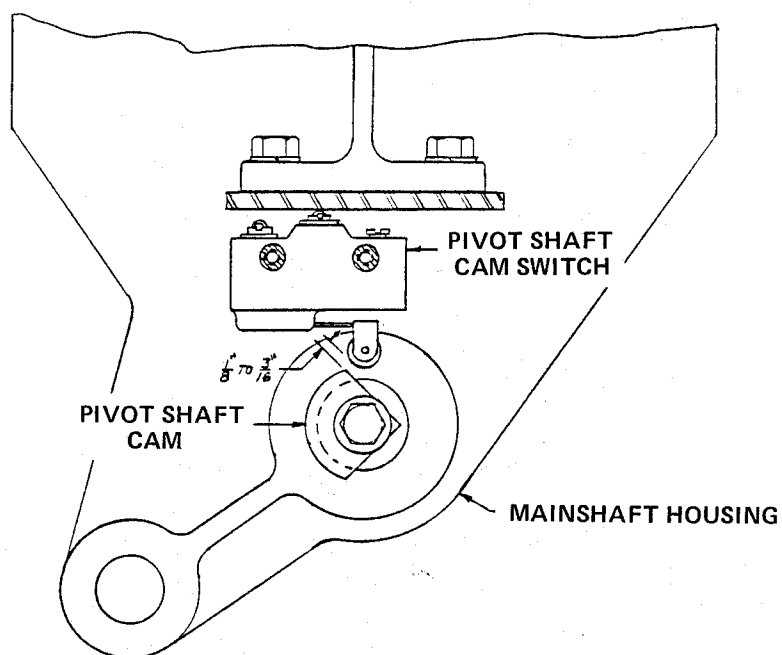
Pivot Shaft Cam Adjustment With Trap in Cocked Position.
